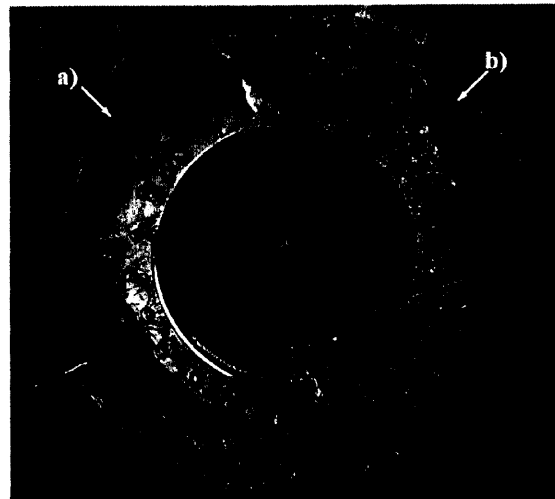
Transversal cross section of the hollow shaft: (a) fractured zone of through wall crack on the hollow shaft and (b) flame cut zone of the shaft.
